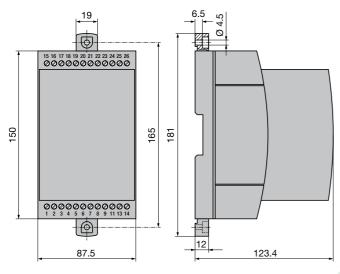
SINEAX DME 400 in housing T24, screw hole mounting brackets pulled out.
